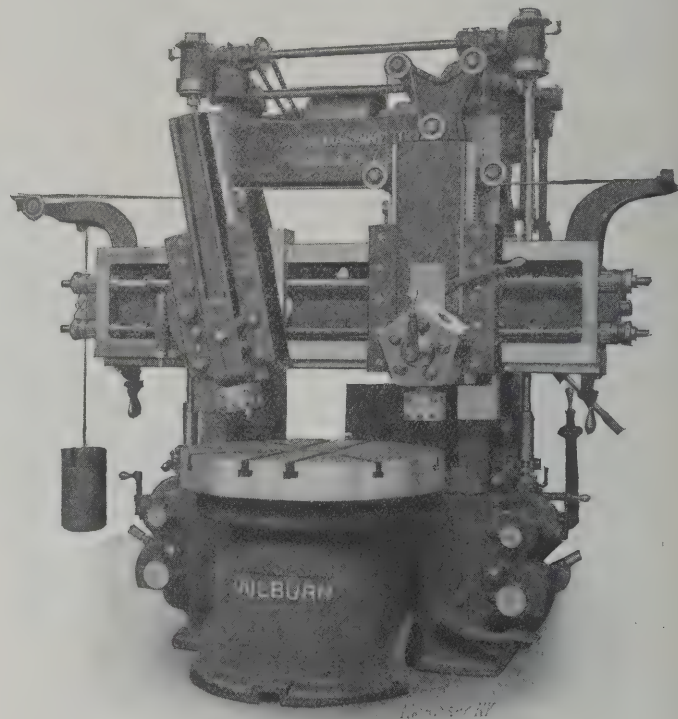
The 42-inch Machine, showing Alternative Form of Feed Box and Turret on the Right-hand Head
